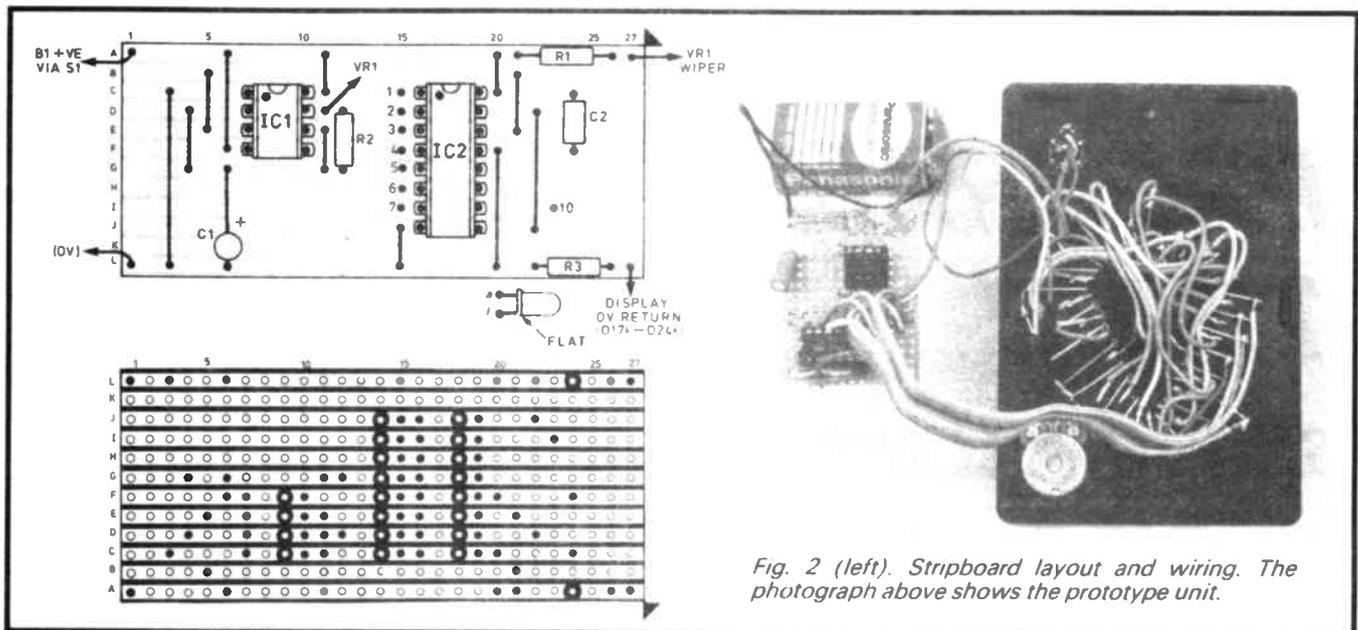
(left). Stripboard layout and wiring. The photograph above shows the prototype unit.
